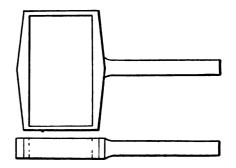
VALVE YOKES-THE FINISHED FORGINGS.
